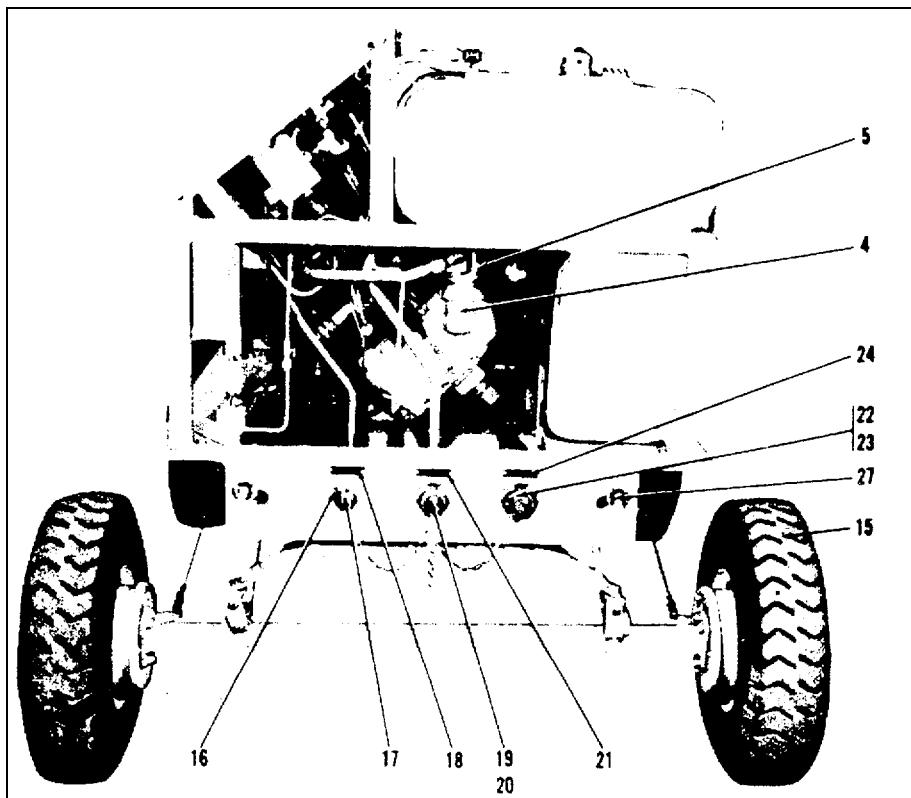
Internal Components Assembly (Sheet 2 of 2)
